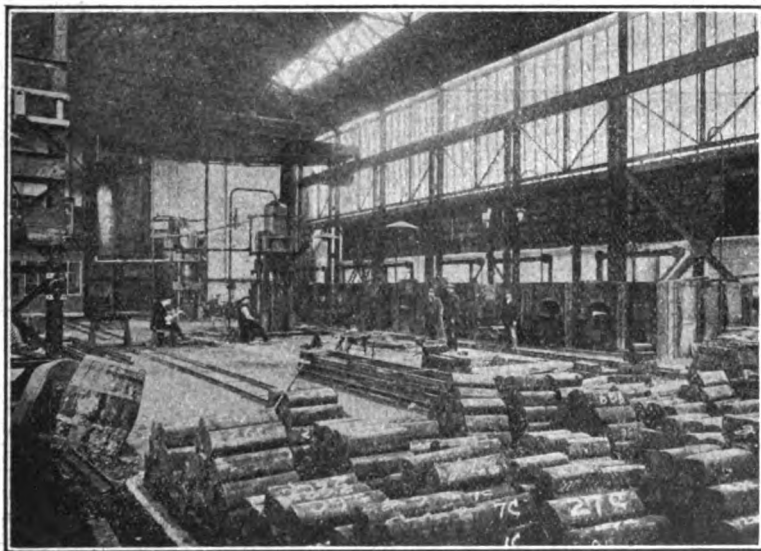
BILLET HEATING IN COKE FURNACE.
